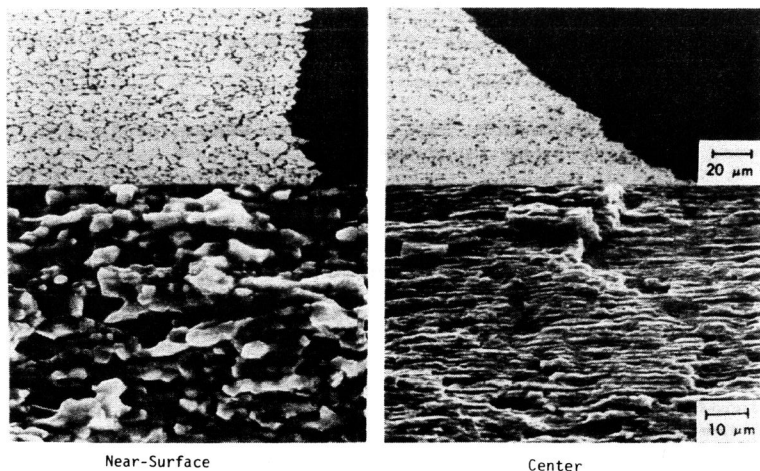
Fracture cross sections and fractographs from near-surface and center regions of peak-aged 2090 sheet.
